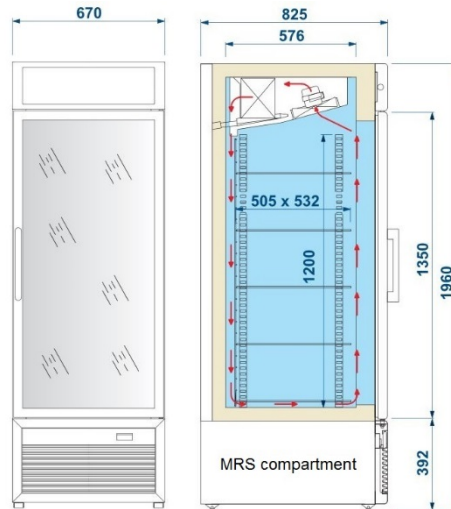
Technical scheme with dimensions of the beverage cooler cabinet
